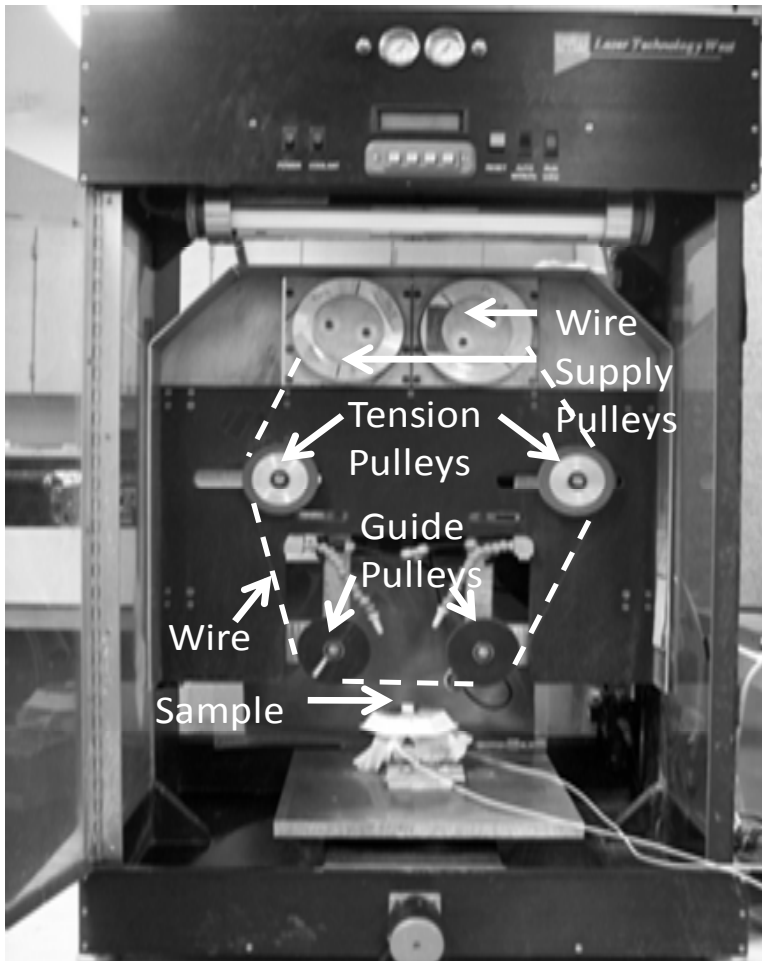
Single wire, spool-to-spool wire saw machine (DWT Inc., Millennium Model). The wire track is marked by the dashed line.
